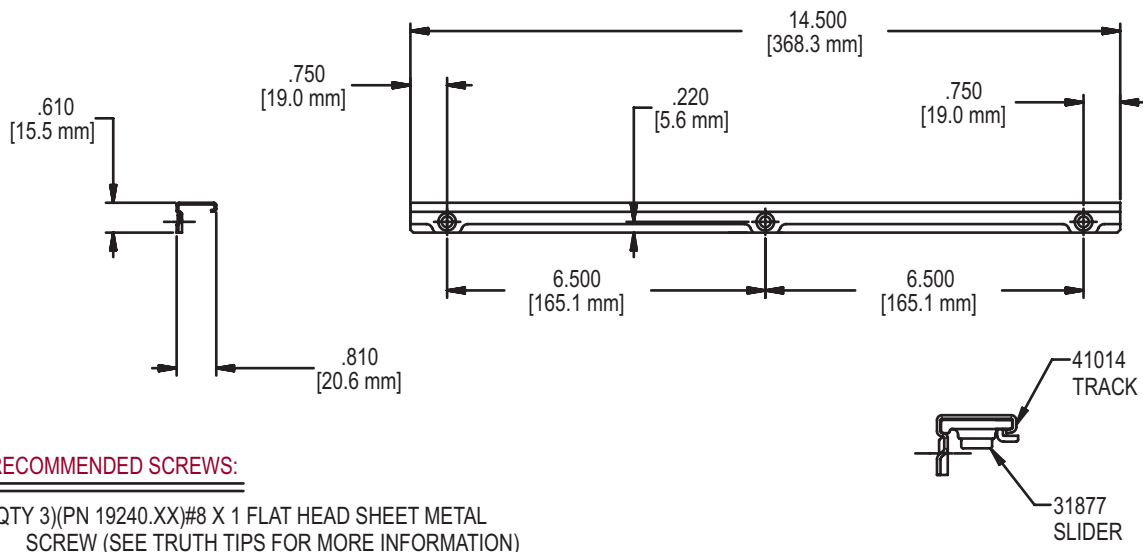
TRACK & SLIDER ASSEMBLY 11576.XX
